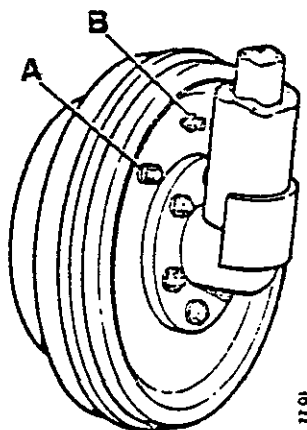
FRONT WHEEL BRAKE ADJUSTMENT
